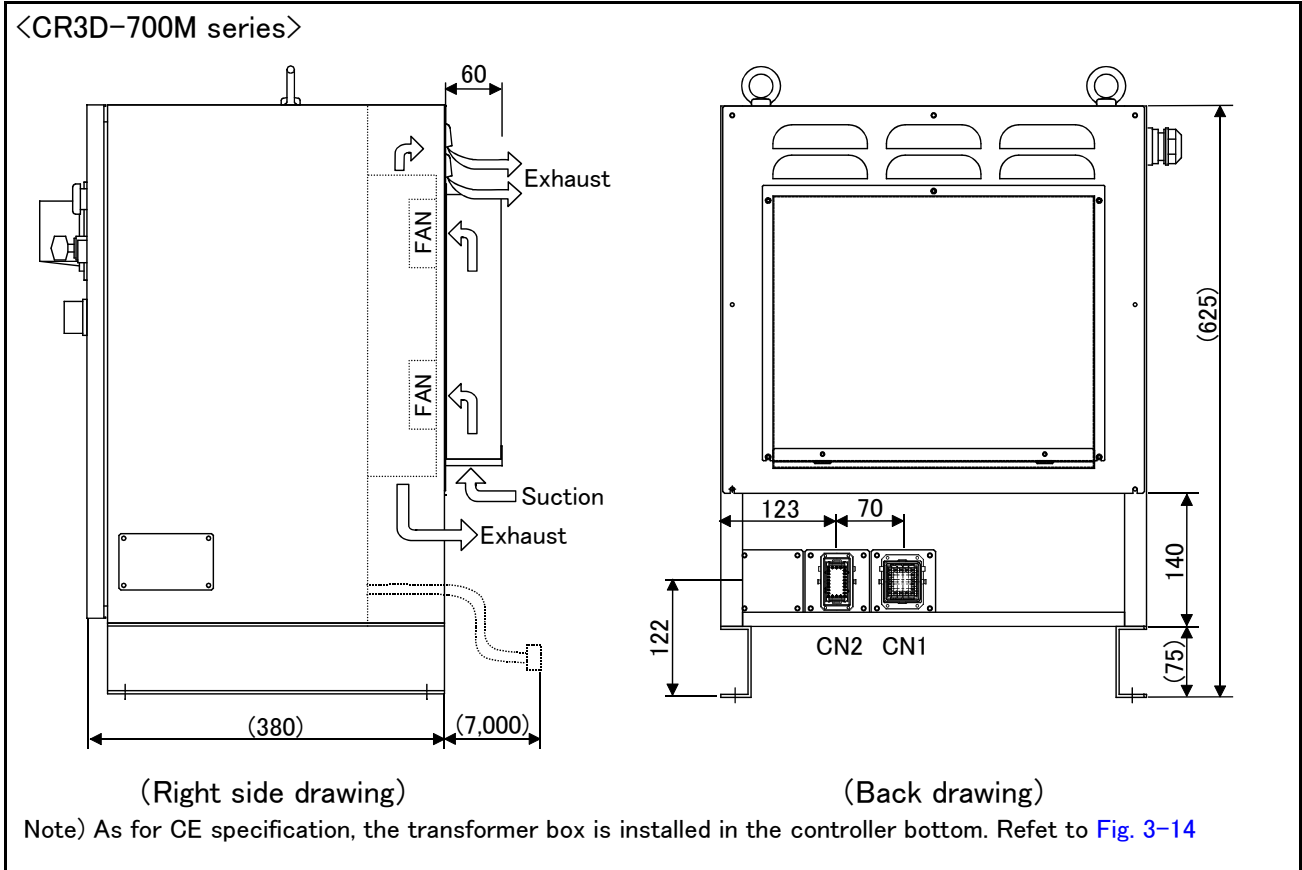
Outside dimensions of controller (CR3D-700M Supplement)
